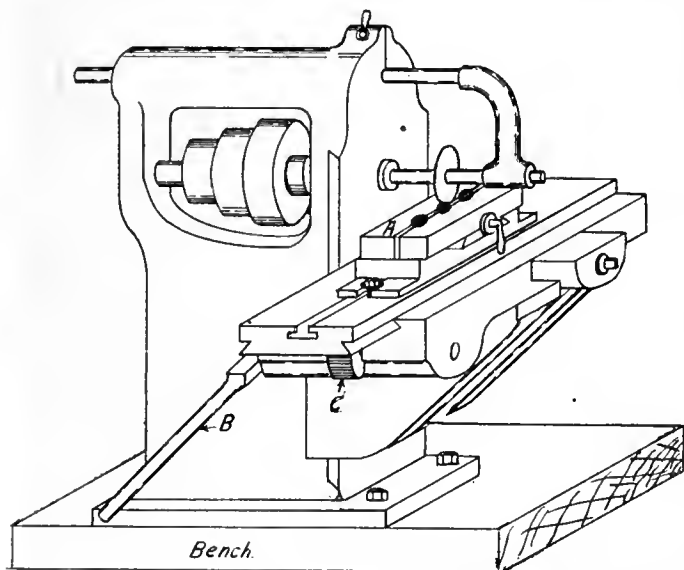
SLOTTING PLUGS ON BENCH MILLING MACHINE.
